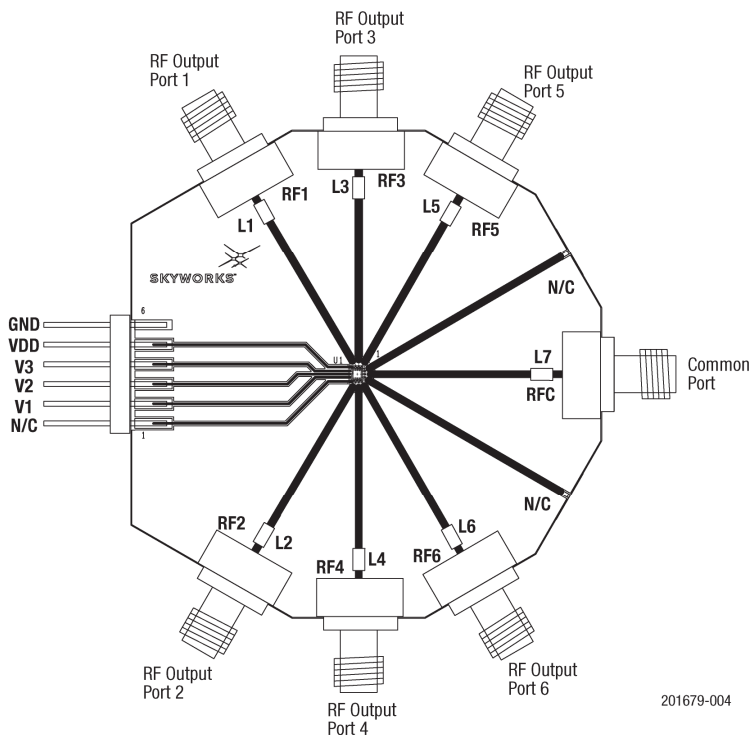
SKY13642-485LF Evaluation Board Assembly Diagram
